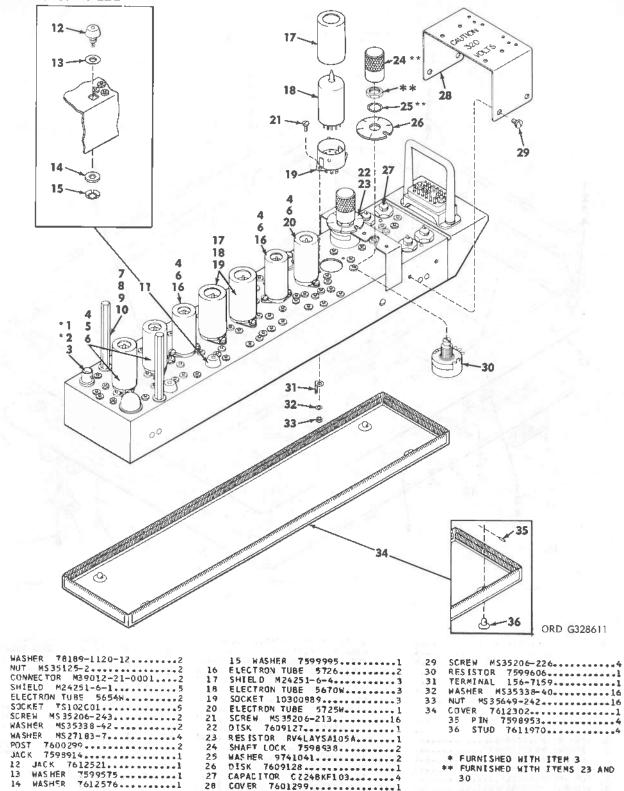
CONTROL, RECEIVER C-14966/M /8607339/-PARTIAL EXPLODED VIEW /SEE FIGURE 96 FOR NEXT HIGHER ASSEMBLY/
